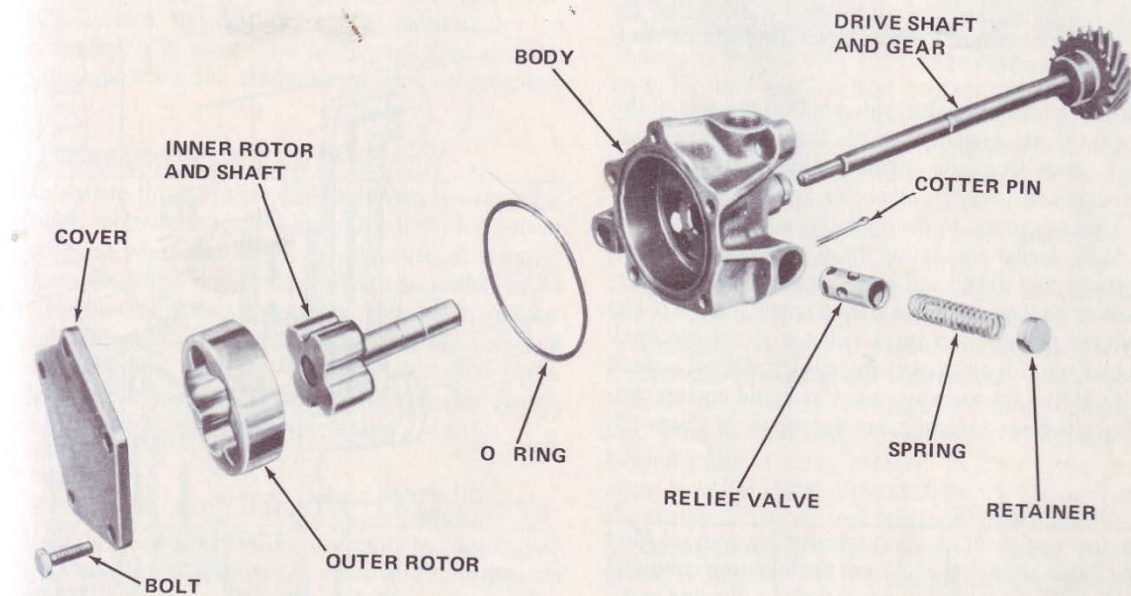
Disassembled rotor-type oil pump. (Chrysler Corporation)
